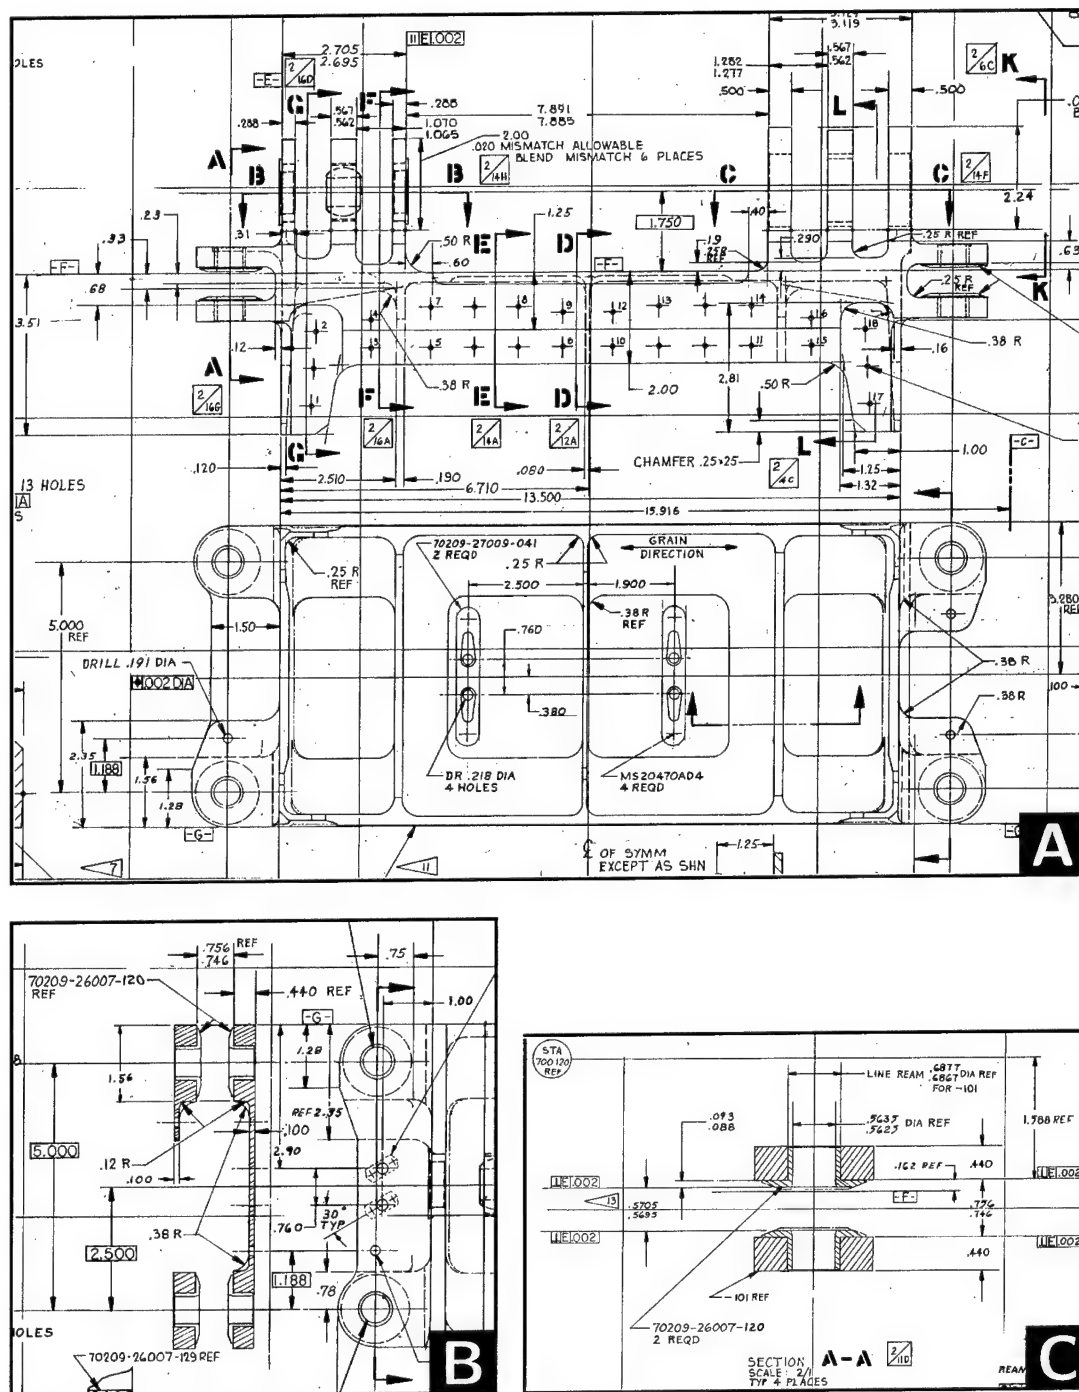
Cross-sections showing dimensions of the cracked lug (zoomed sections from Sikorsky drawing 70209-27001). Box A shows the centre-box. Box B shows a vertical cross-section of the cracked lug. Box C shows a horizontal cross-section of the cracked lug.
